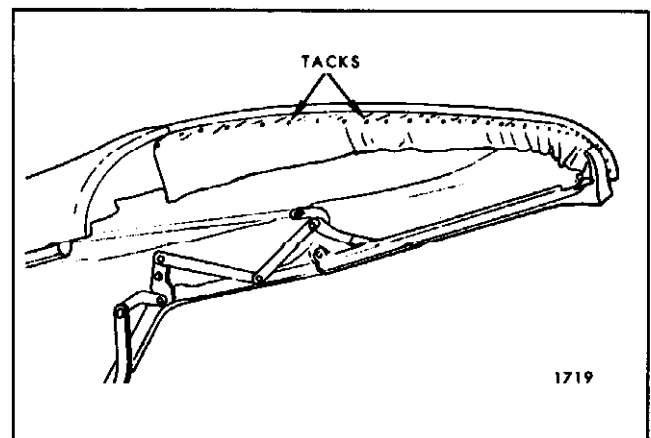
Installation Of Top Material To Front Roof Rail
